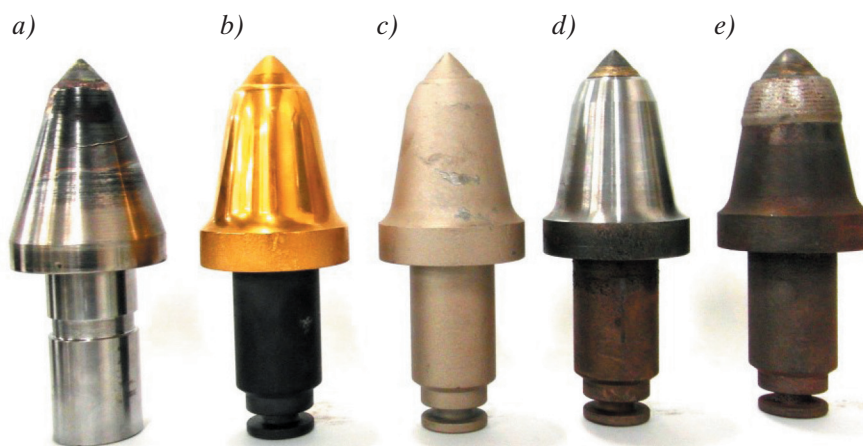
Selected picks intended for testing: a) Casted 22; b) Gold 25; c) Commercial 22; d) Silver 22; e) Hardfaced 25
